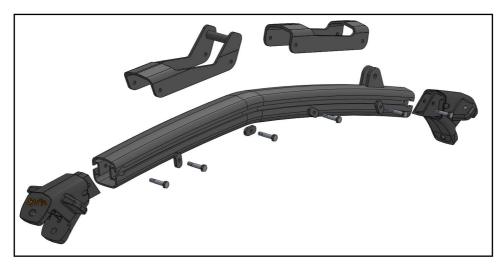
Manufacturable Part; Exploded view Source: Exero [7]
